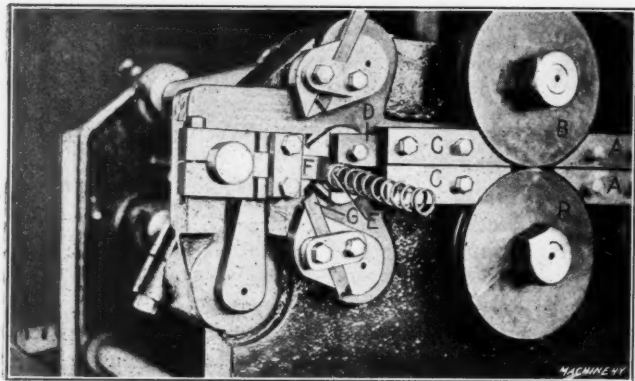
Operating Mechanism of Sleeper & Hartley Spring Coiler
